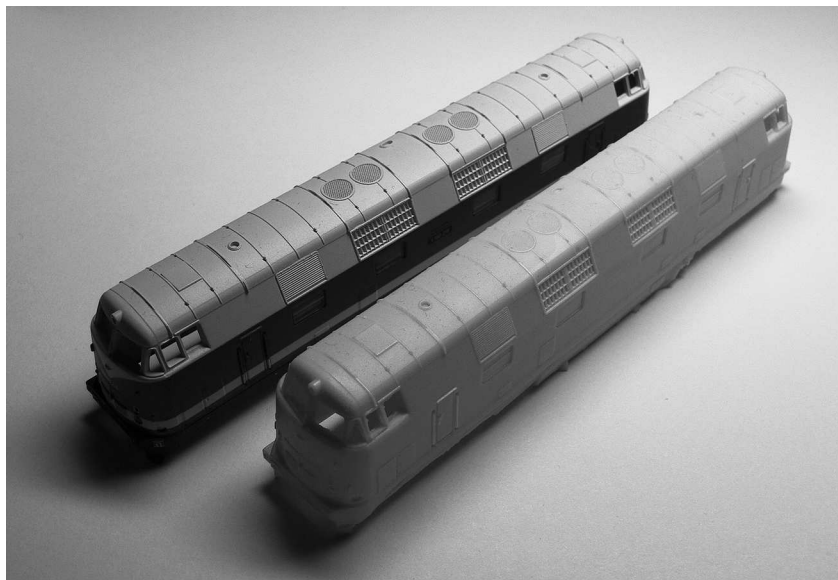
Original shell and polyurethane copy made with the mold of Fig. 9
